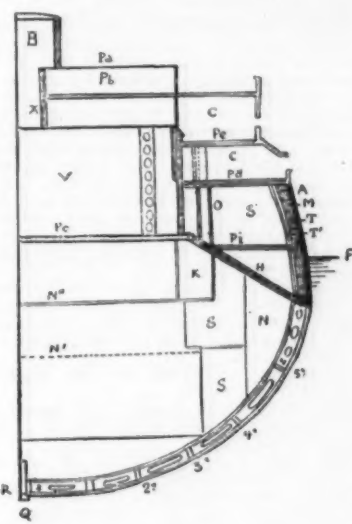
PROJECTION UPON THE TRANSVERSE PLAN OF AN ARMOR-CLAD.
